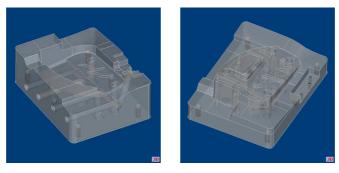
Cavity (left) and core (right) machined directly on plates 2 and 3.
